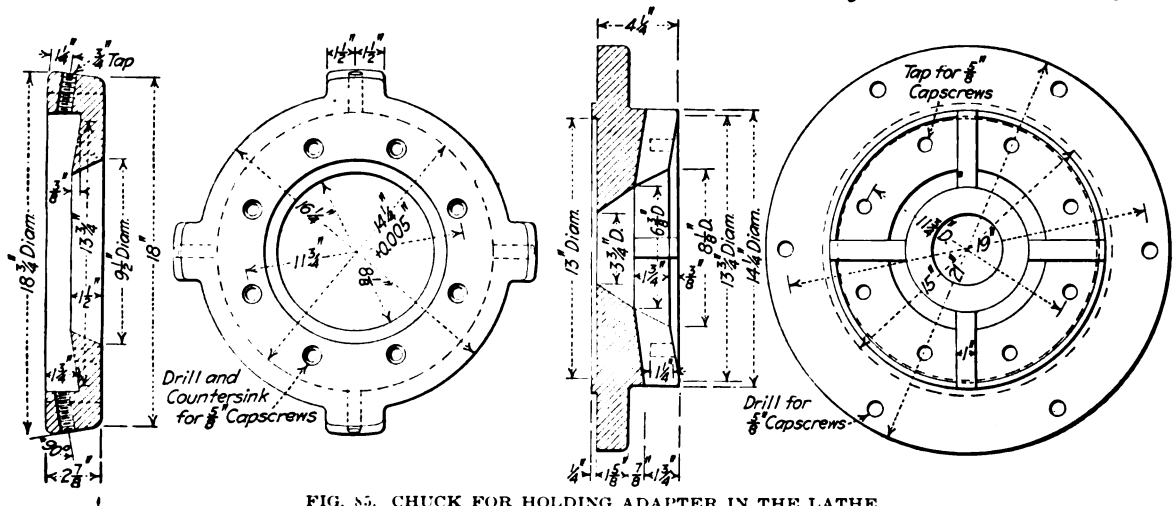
CHUCK FOR HOLDING ADAPTER IN THE LATHE
